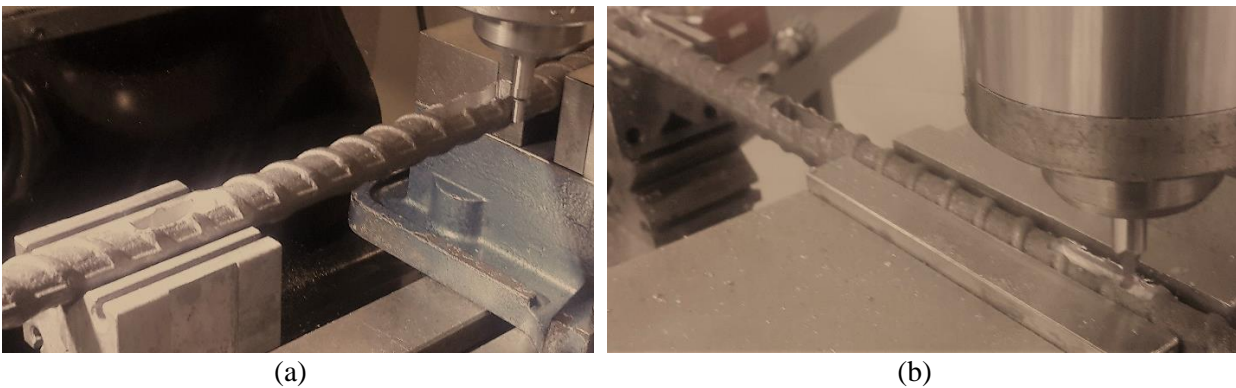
The process of creating the defects in rebar: (a) Identifying the desirable position of defects using an edge finder, (b) Creating the defect using a face drill bit.
